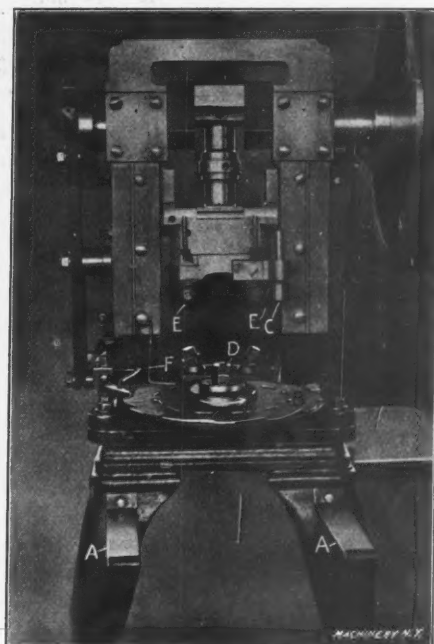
Crimping Machine for Tightening the Cartridge Case on the Bullet after Loading
